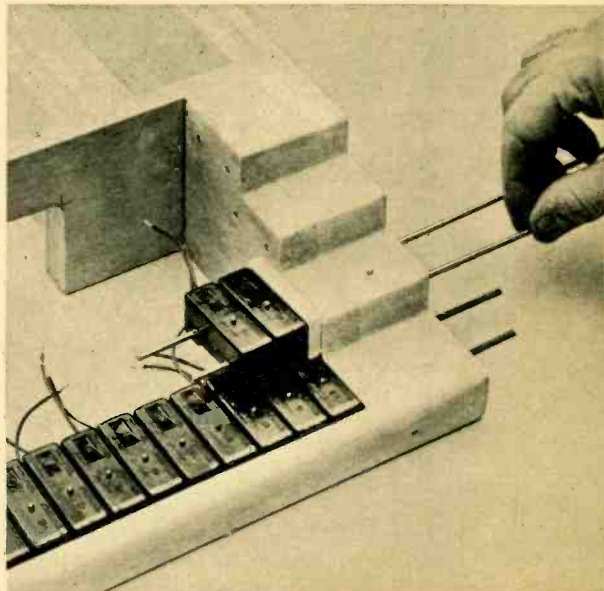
Cutaway view of keyboard shows how the microswitches are mounted and are held in place.
